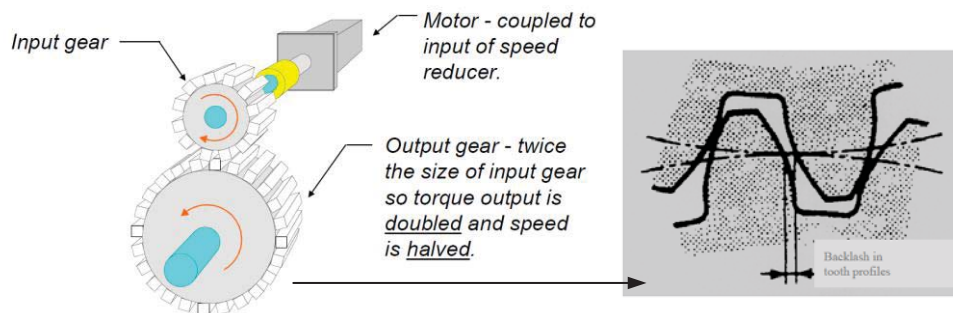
A gearbox in the coupling of the motor and the load [11].
